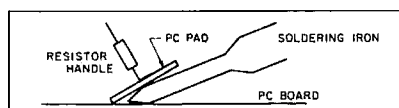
If you don't use an etched PC board you can make your own mounting pads and solder them to blank PC board material as shown.
